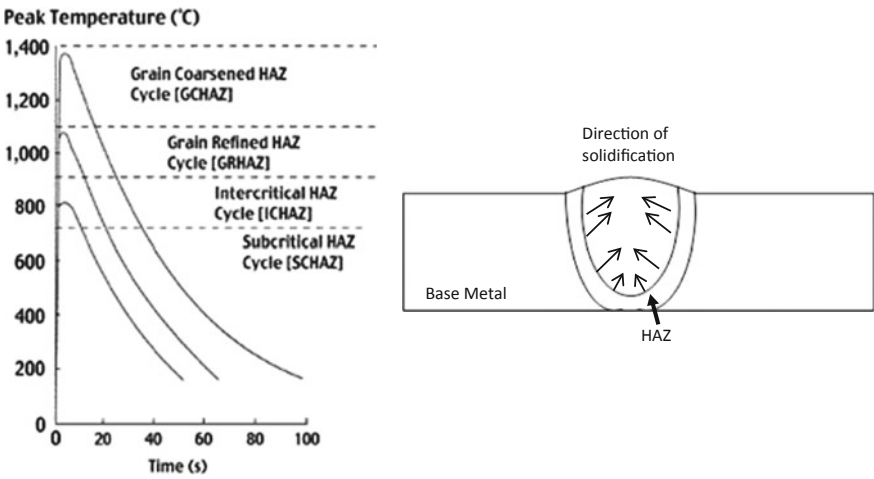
Weld peak temperature and grain transformation during welding process
